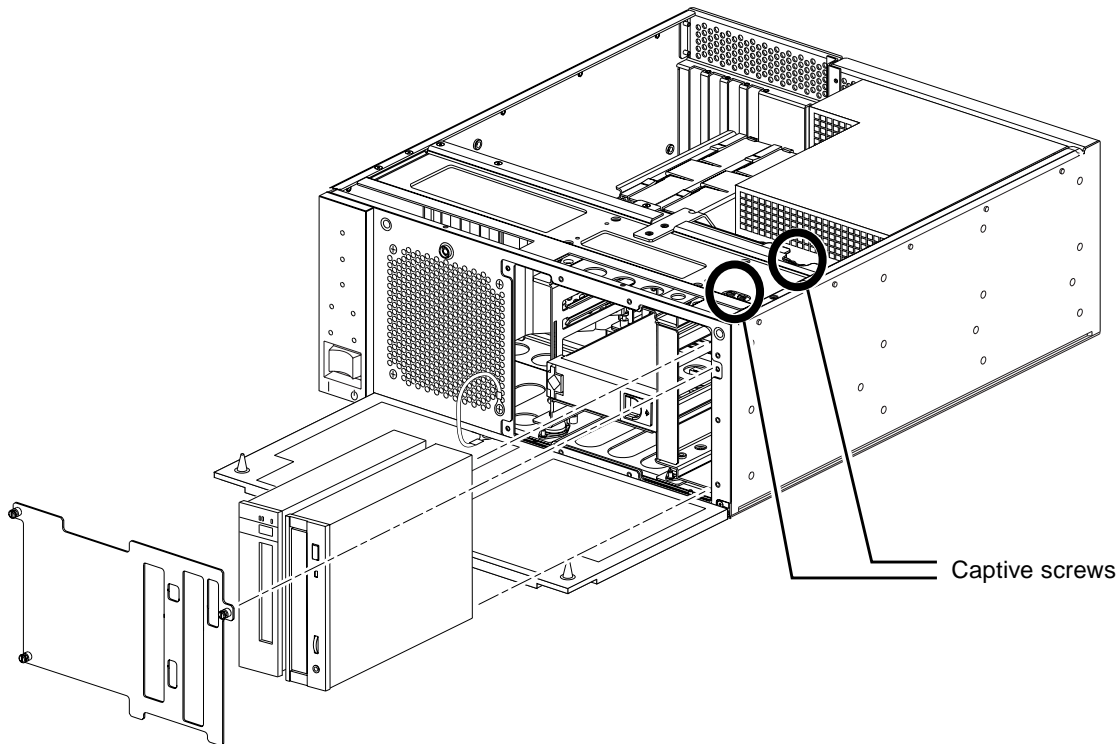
Removing and Replacing the CD-ROM or Tape Drive
